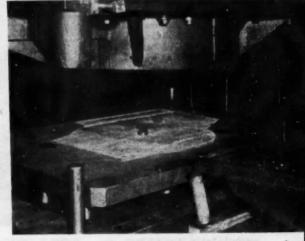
Shown here is a ¼-in. blank heated to 1200 F and located over pins in a die in the Verson press, ready to be drawn to a depth of six in. The workpiece will become a side plate for a planetary georcase.
